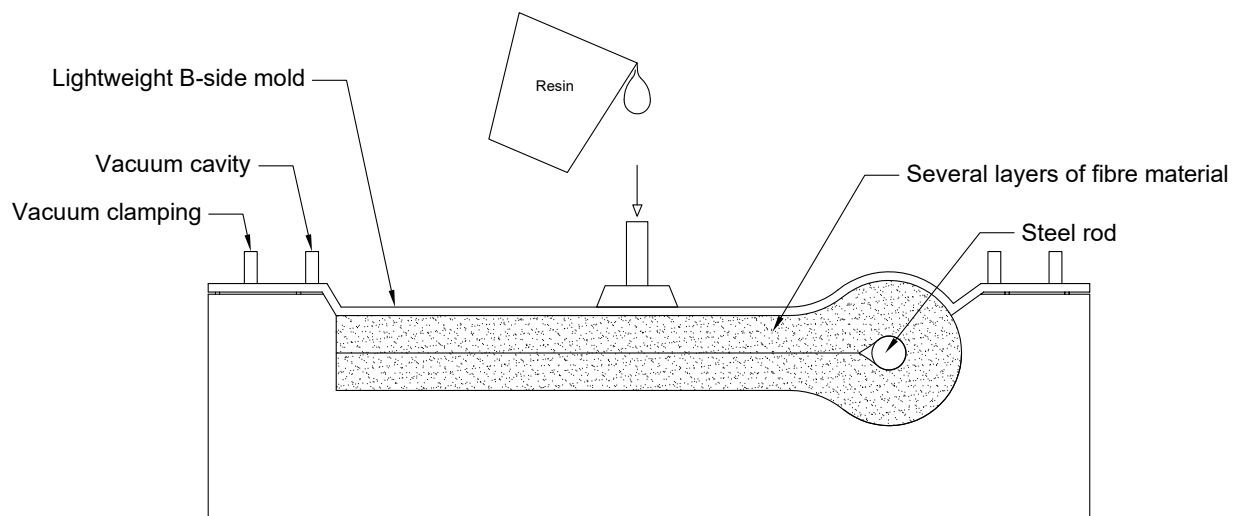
Proposed mould for fabrication of embedded sheet (vacuum moulding)
